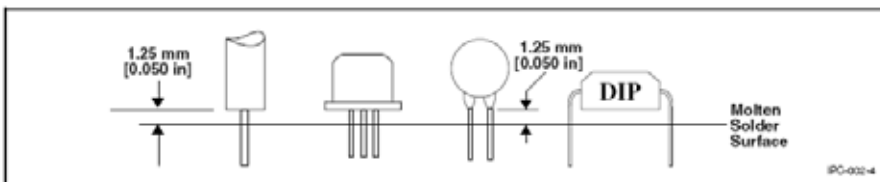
Solder Dipping Depth for Through-Hole Components
